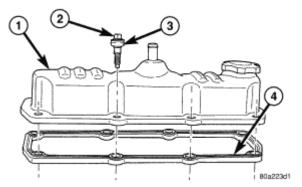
Cylinder Head Cover Gasket Courtesy of CHRYSLER LLC
